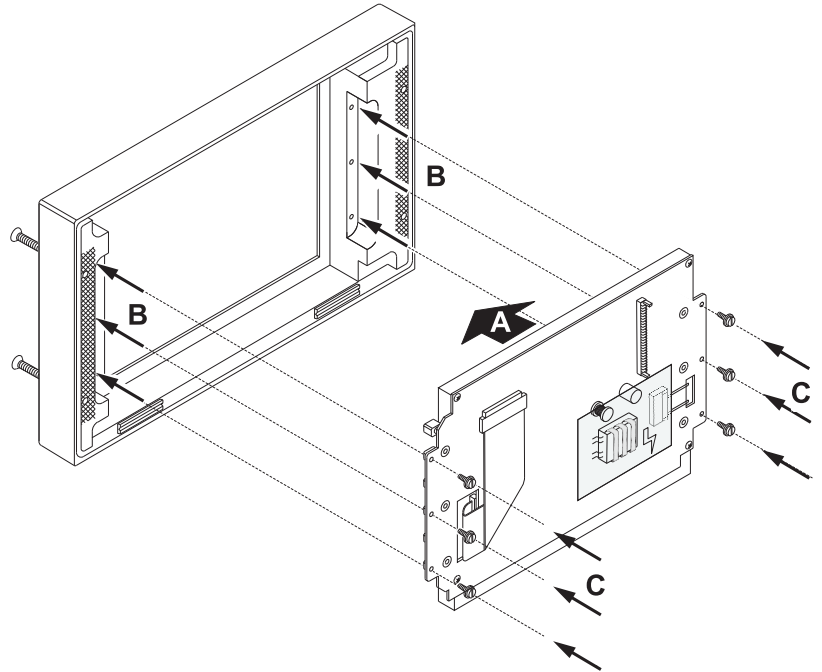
Placing and fastening the new display assy to the front panel
